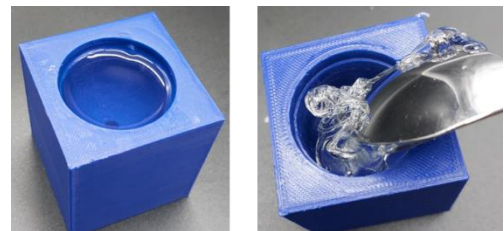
left: casted paraffin wax in mold, right: molten polycaprolactone which is placed in mold with spoon
